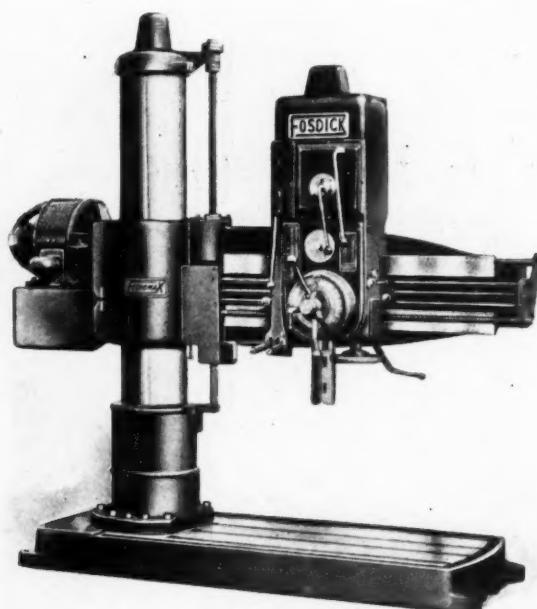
Fosdick Radial Drilling Machine with Hydraulic Control for the Head and Arm
